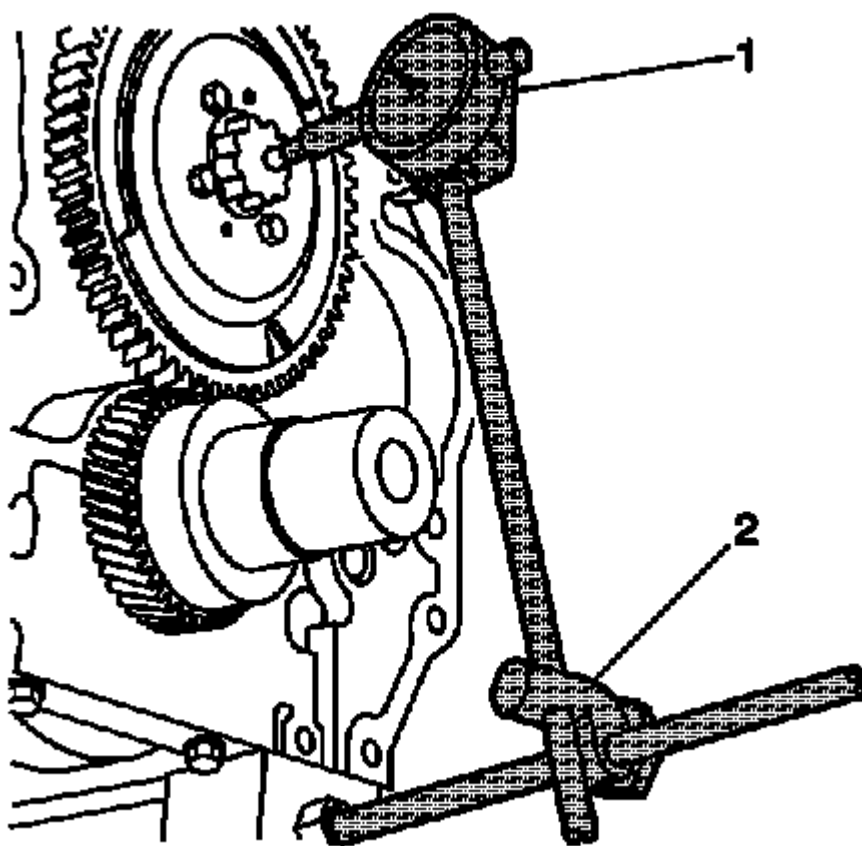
Measuring Camshaft End Play Using J 26900-12 & J 26900-13
